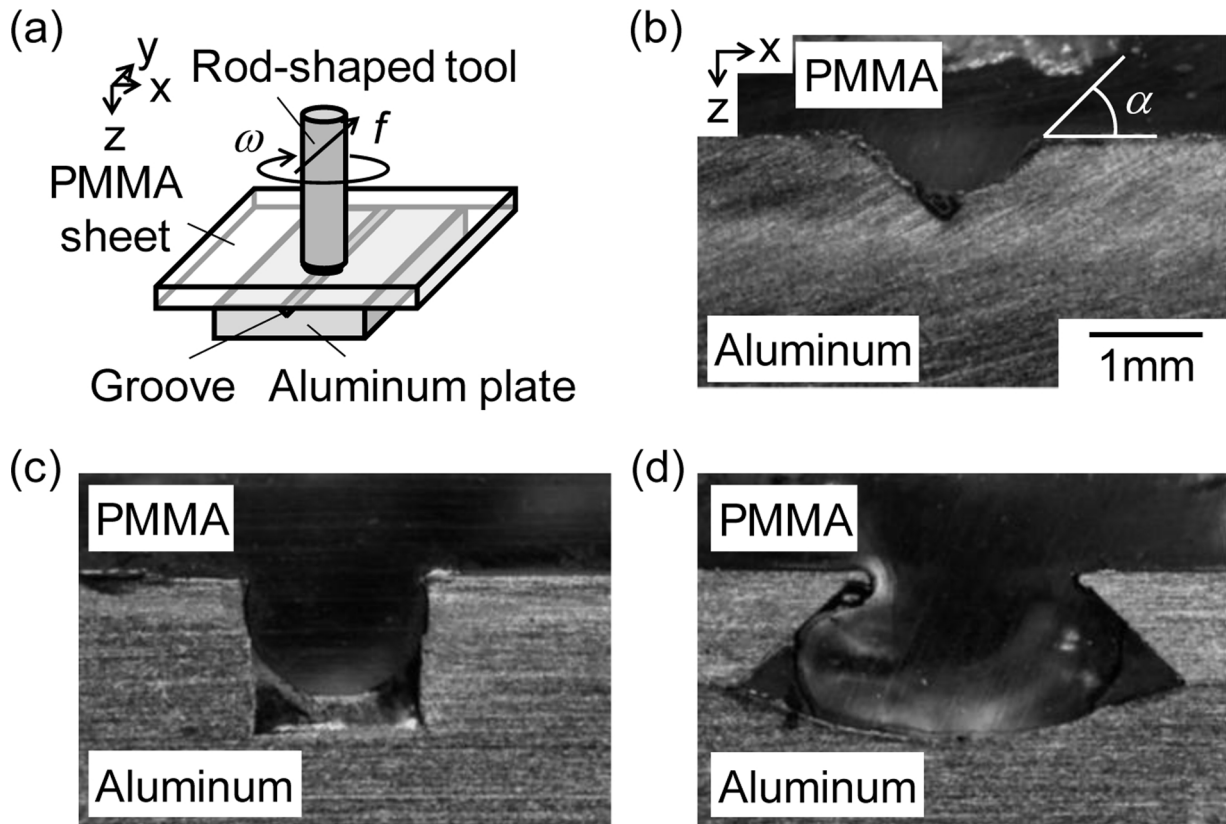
Photographs of x-z cross-section of interface between groove in aluminum plate and PMMA sheet after FSIF process with $\omega = 6000$ rpm and $f = 10$ mm/min: (a) schematic illustration of arrangement of tool, sheet and plate, (b) surface angle of groove: $\alpha = 45^\circ$ (no joining), (c) $\alpha = 90^\circ$ (no joining), (d) $\alpha = 135^\circ$ (joining).
